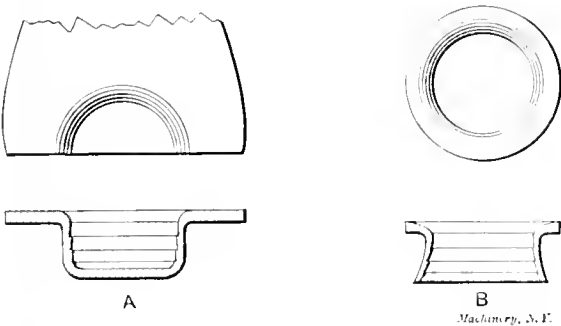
Sectional View of Drawn Rivet Shell, showing marks left by Stepped Punch
